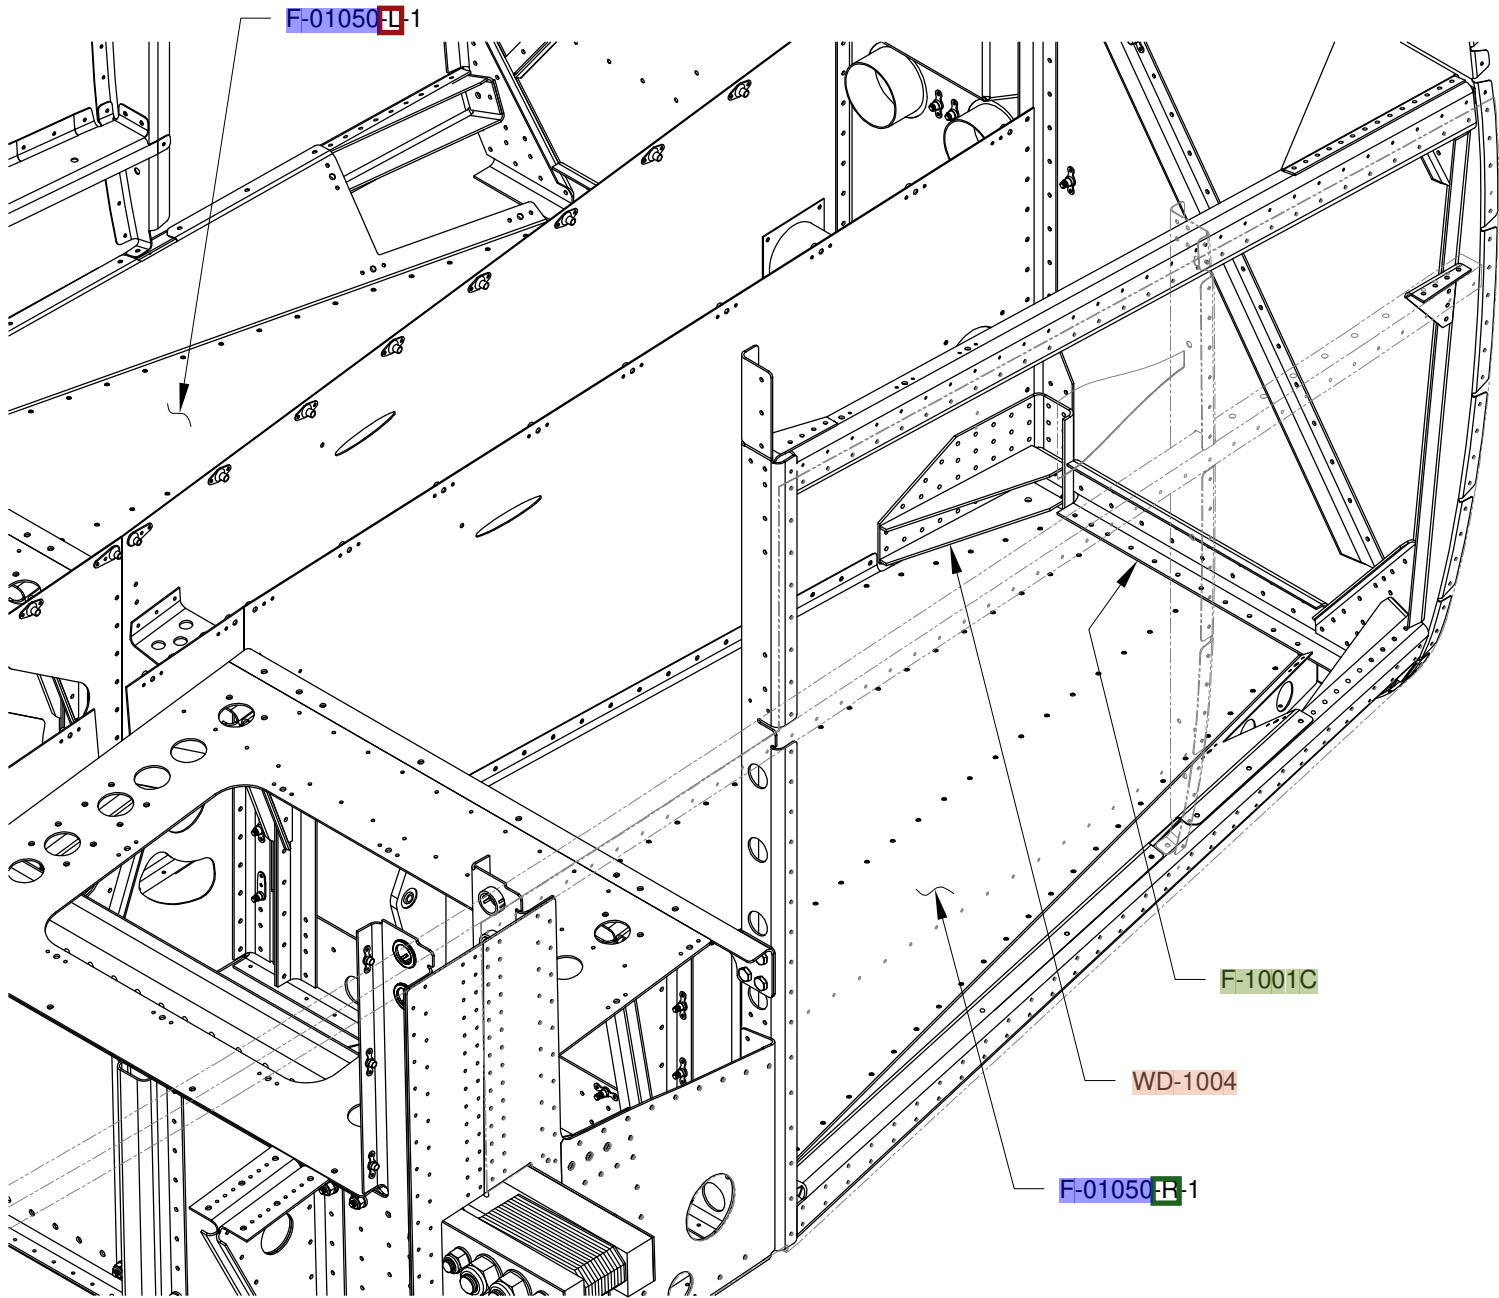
FWD CABIN FLOOR PANEL INSTALLATION
